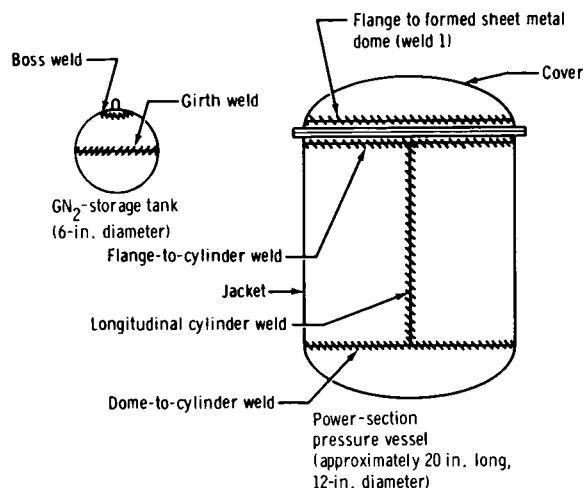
The GN_2 -blanket-pressure tank and power-section pressure-vessel assembly components and welds.
